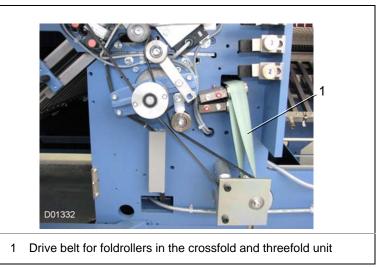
Drive belt for foldrollers in the crossfold and threefold unit
